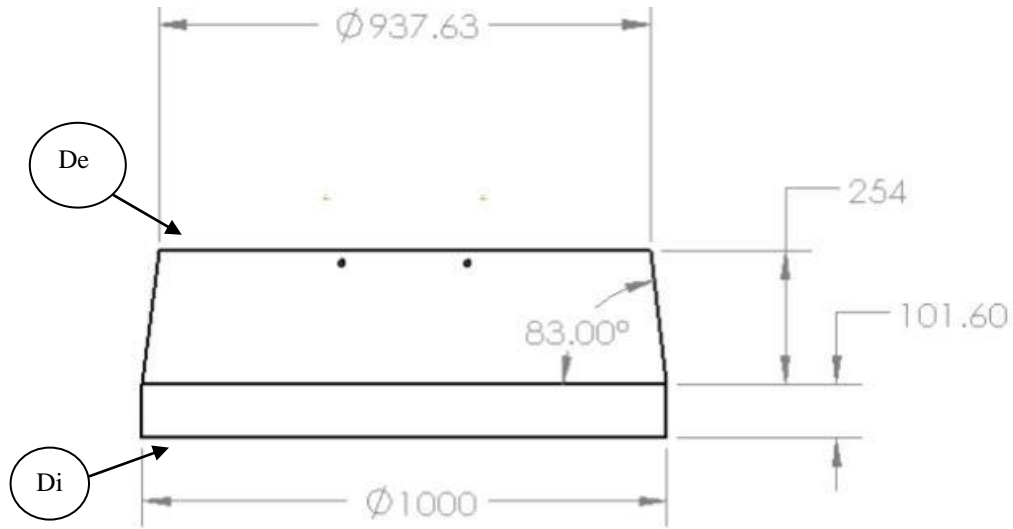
(The sketch of thrust duct, the dimension in mm)
